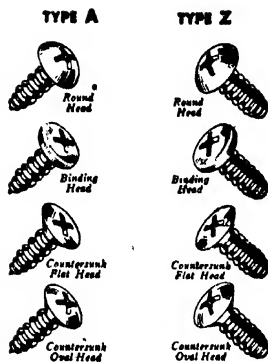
SELF-TAPPING SCREWS WITH PHILLIPS RECESS HEAD
